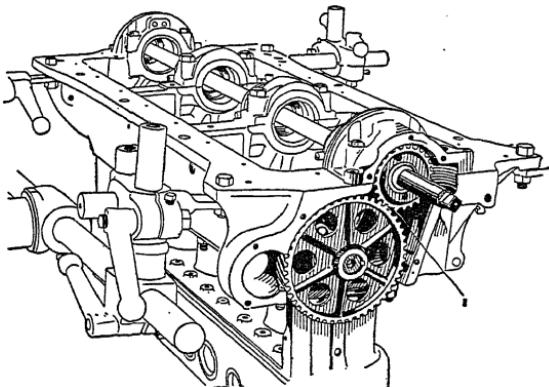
When Setting Up the Main Bearing Reamer or Boring Bar, Always Check Gear Lash as Indicated at Arrow 1
